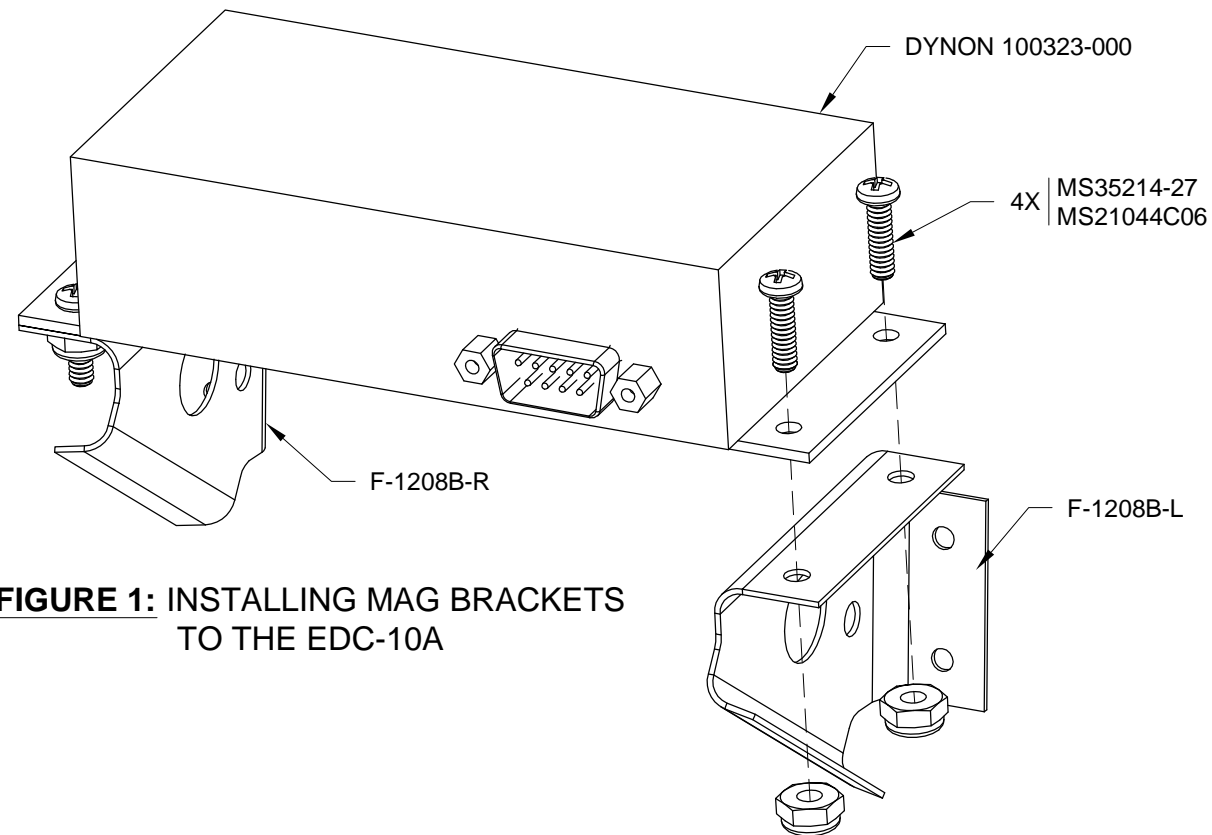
INSTALLING MAG BRACKETS TO THE EDC-10A
